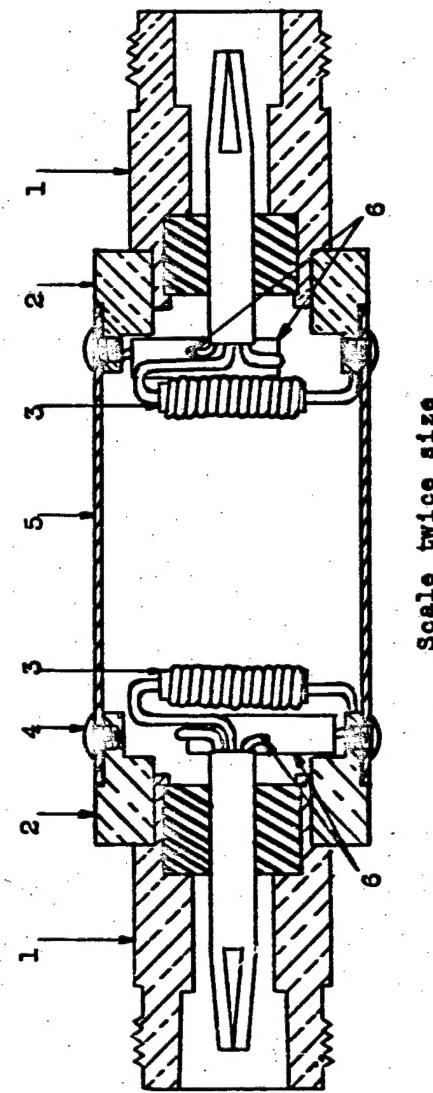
CONSTRUCTION OF CO-AXIAL PAD
